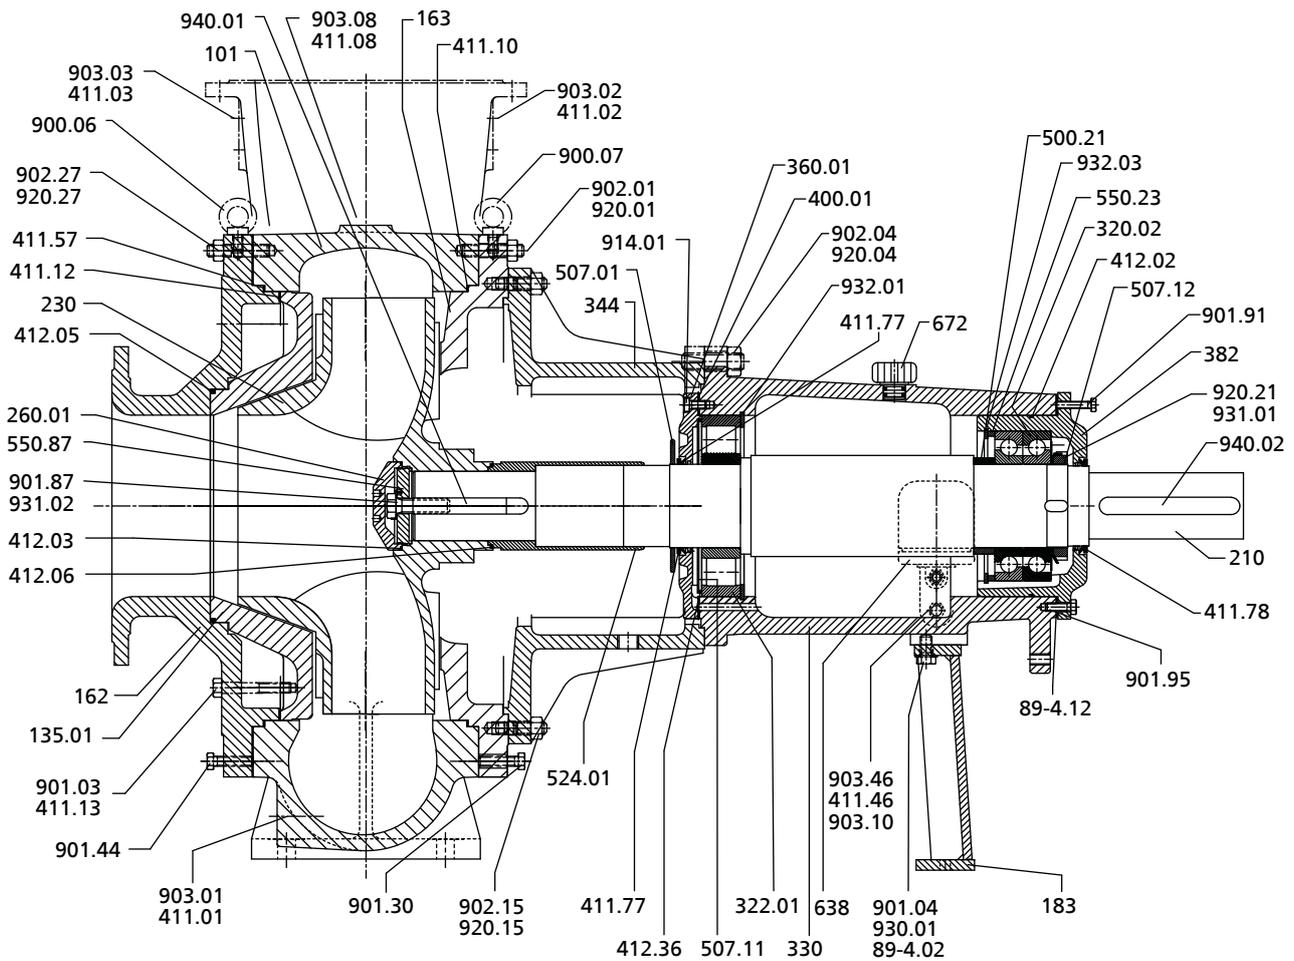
General assembly drawing of pump with bearing bracket P10ax to P12sx: sizes 500-400-710 and 500-400-713
